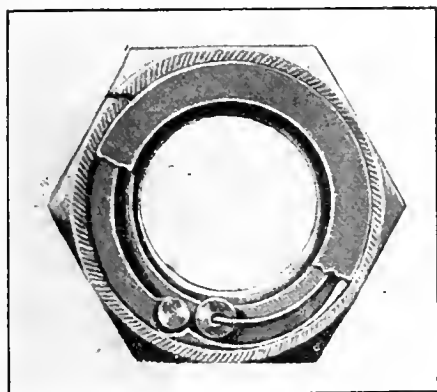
ROLLER LOCK-NUT, PART SECTION.
